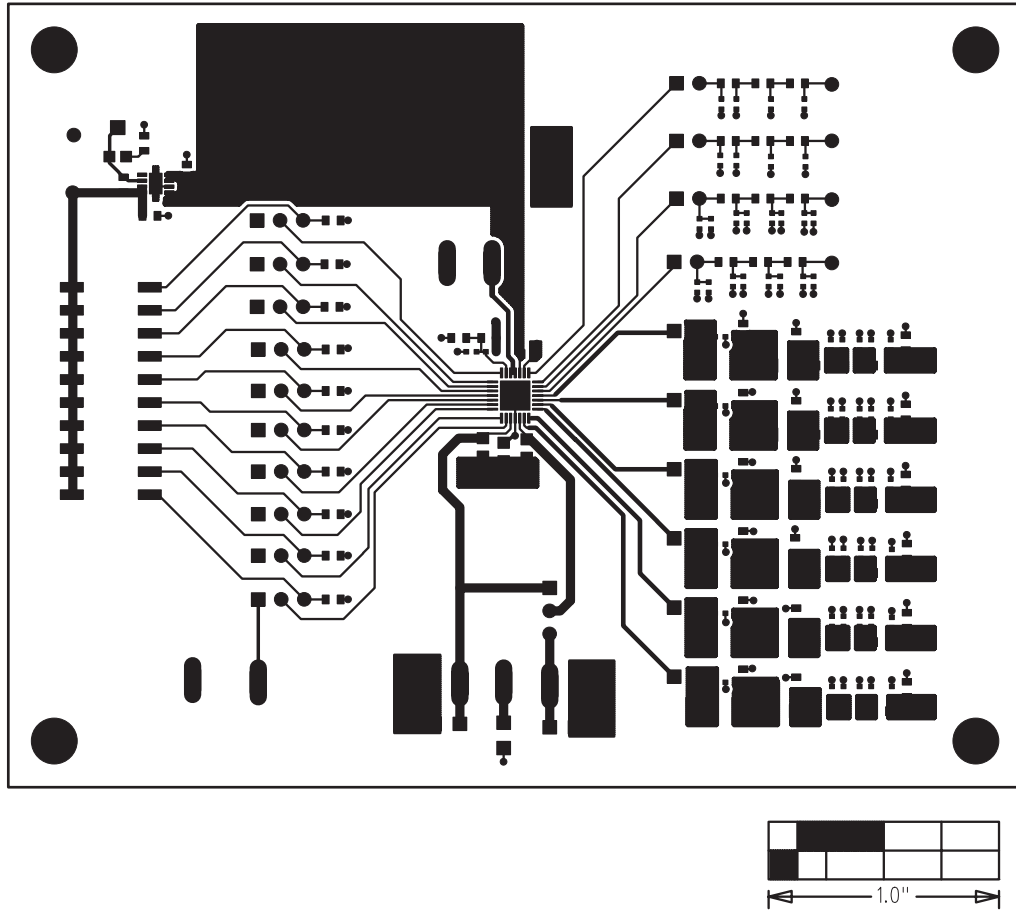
MAX17108 EV Kit PCB Layout—Component Side
